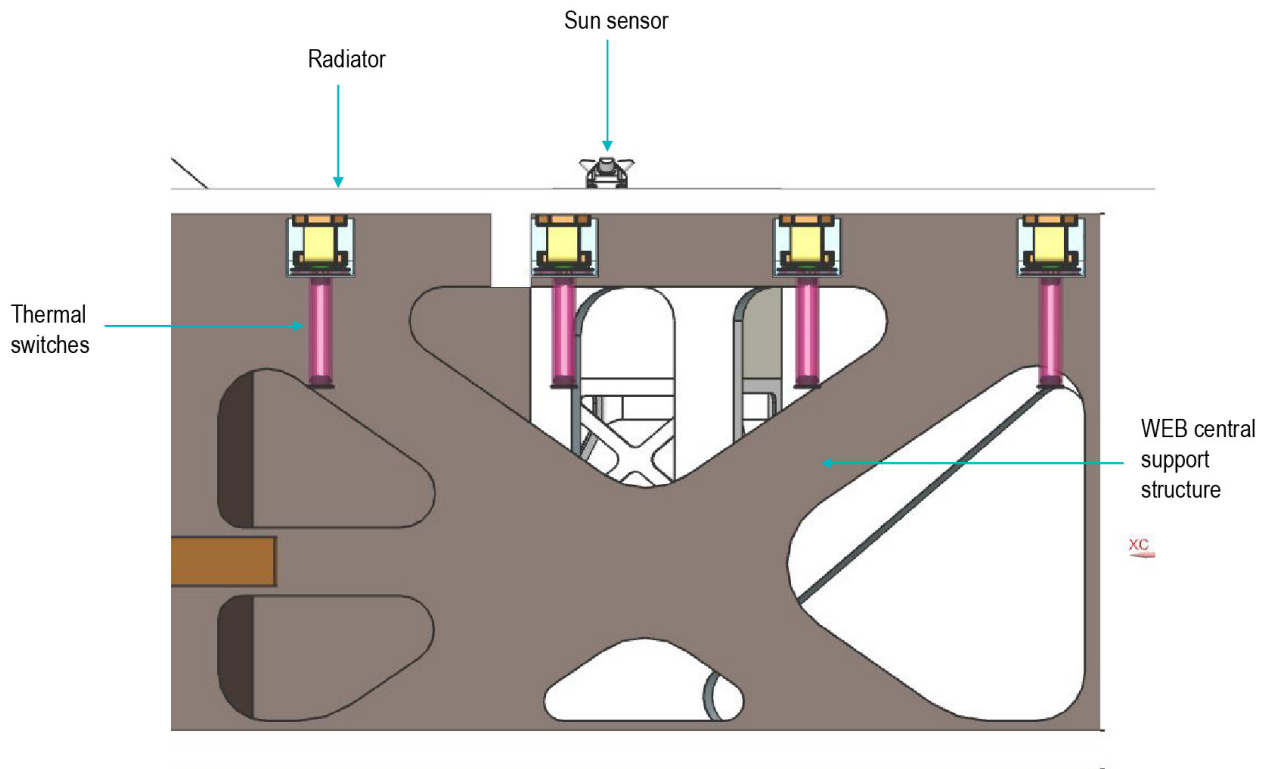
Right side cross-sectional close-up view showing the thermal switches.
